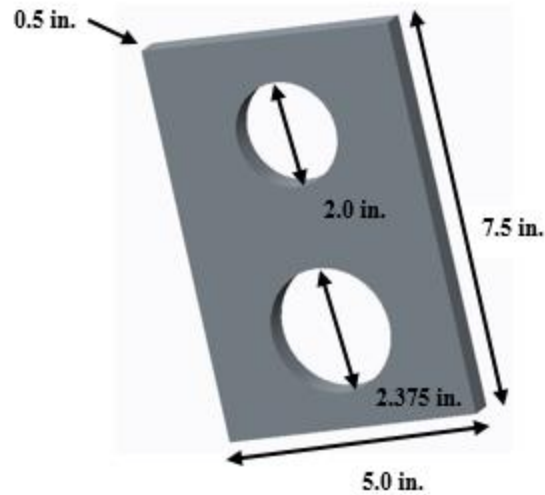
CAD drawing of the connection block. The lower hole is what is welded to the aluminum frame, while the upper hole is where the bridle connects to the body.
